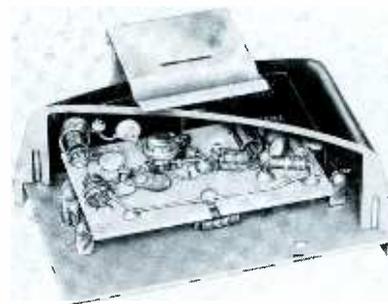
Cutaway view of Winegard MA-300 showing internal construction.
